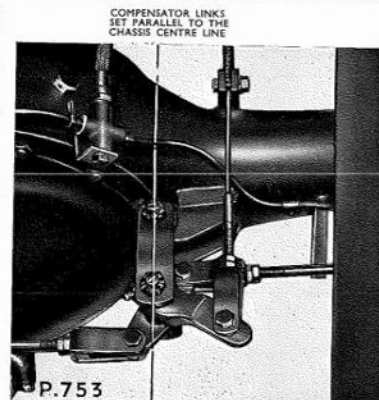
Handbrake compensator position for handbrake cable adjustment
